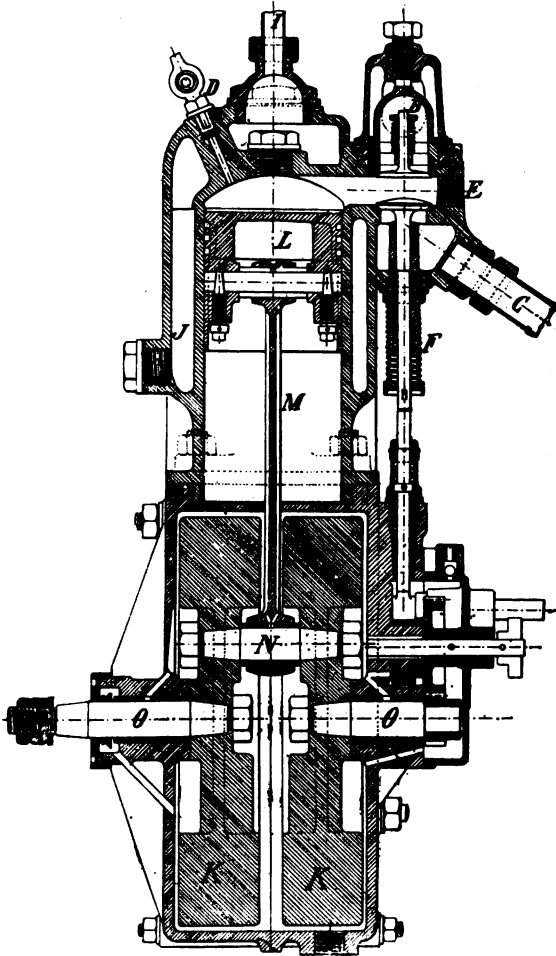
VERTICAL SECTION THROUGH DE DION WATER COOLED MOTOR.
